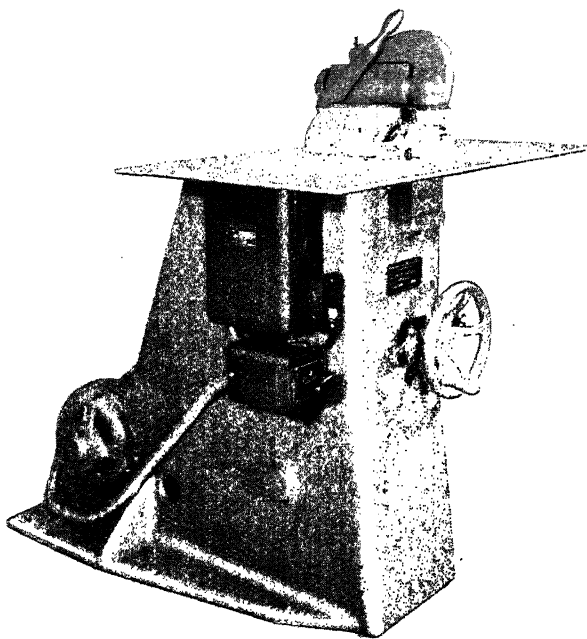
THE ERCO SHEET METAL FORMING MACHINE USED FOR FLANGING AIRCRAFT PARTS. (A. C. Wickman Ltd.)
